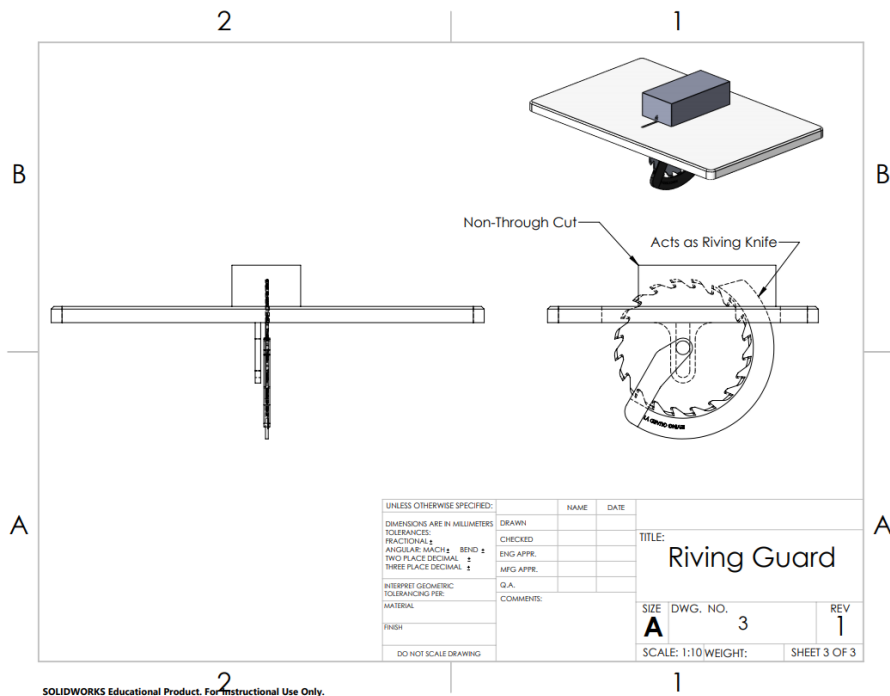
Technical drawing of the original drive shaft-mounted riving guard, displaying how the guard acts with a non-through cut.
